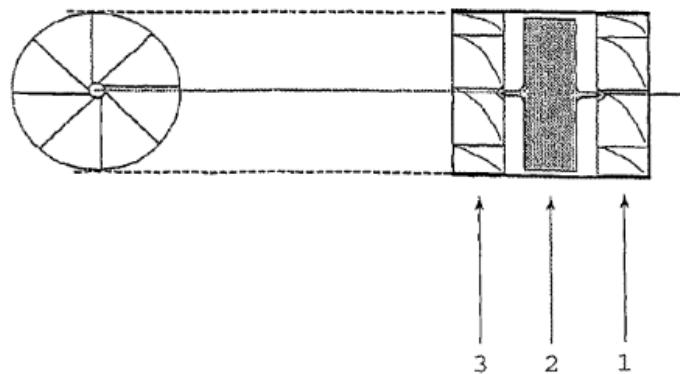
Technical drawing of the FlowMir turbine where pieces are connected.⁶
